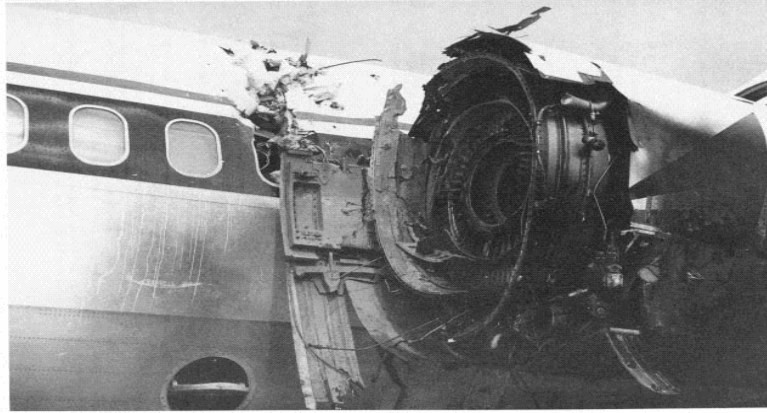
Uncontained fan disk failure due to an abusively machined bolthole
